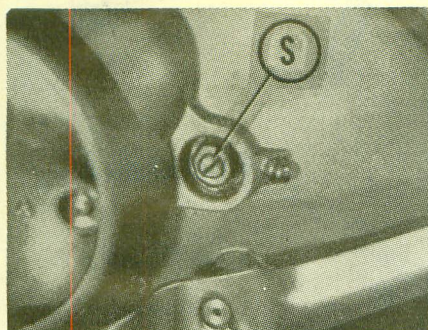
The clutch adjusting screw (S) is located under rubber plug in engine left side cover.
